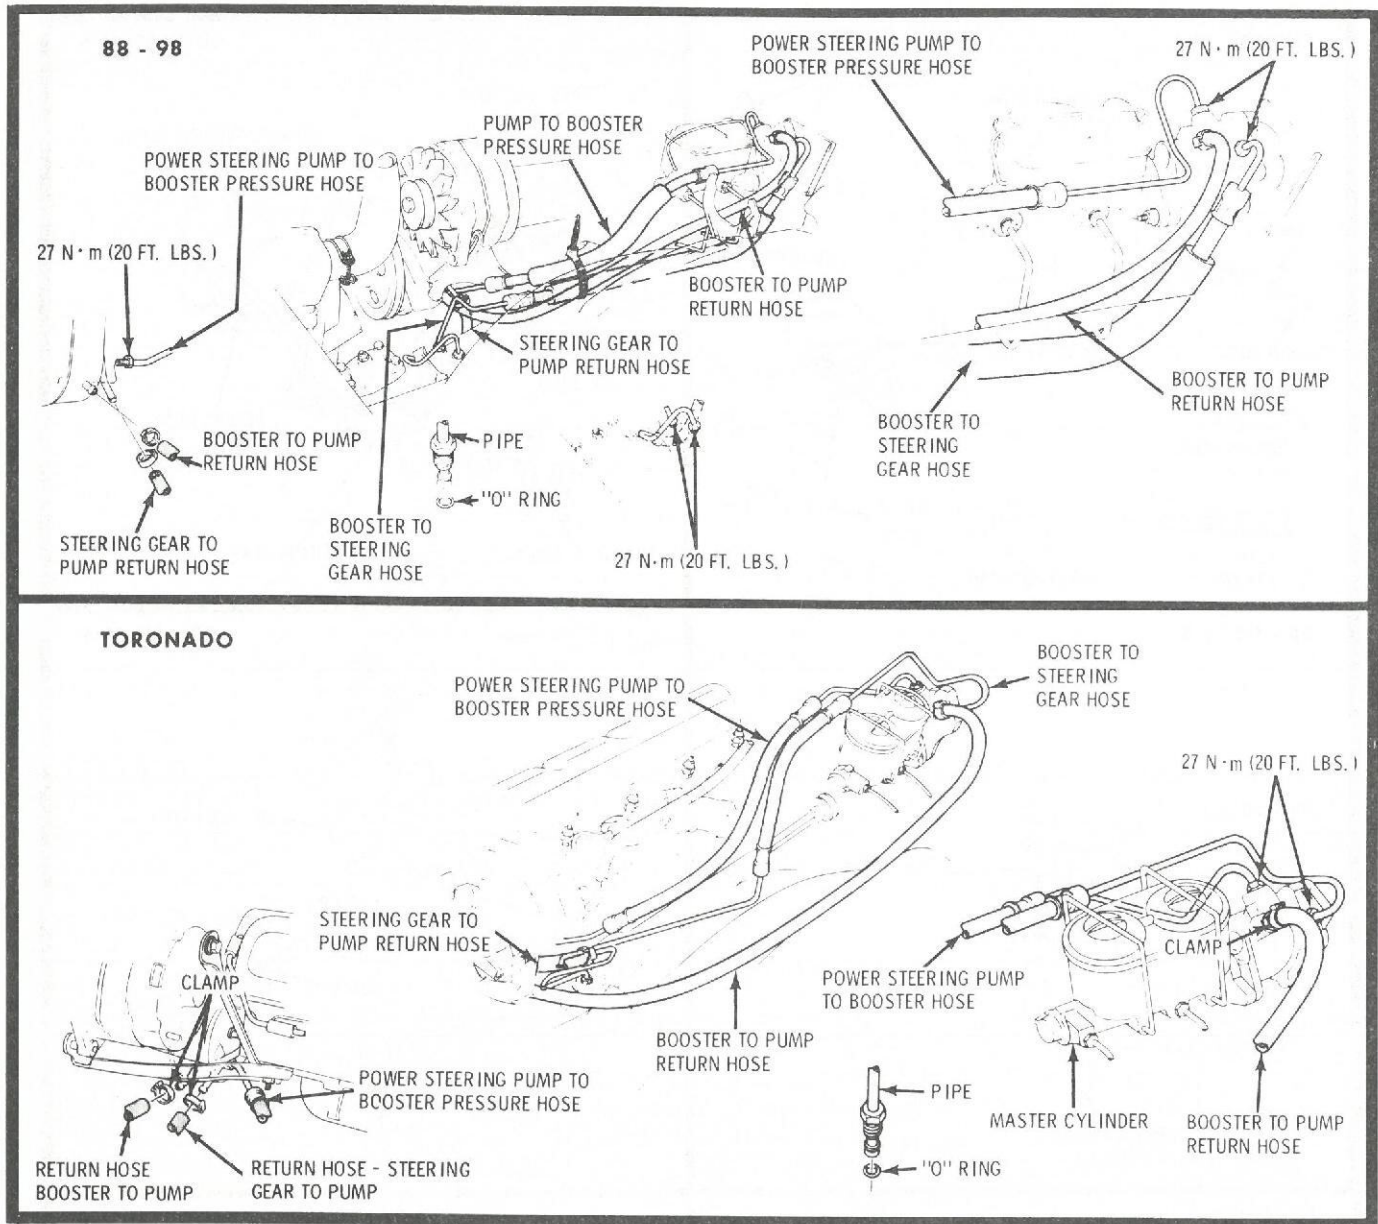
Power Steering Hose Routing (V-8 Diesel Exc. Cutlass) - Replaces Figure 3B3-10
